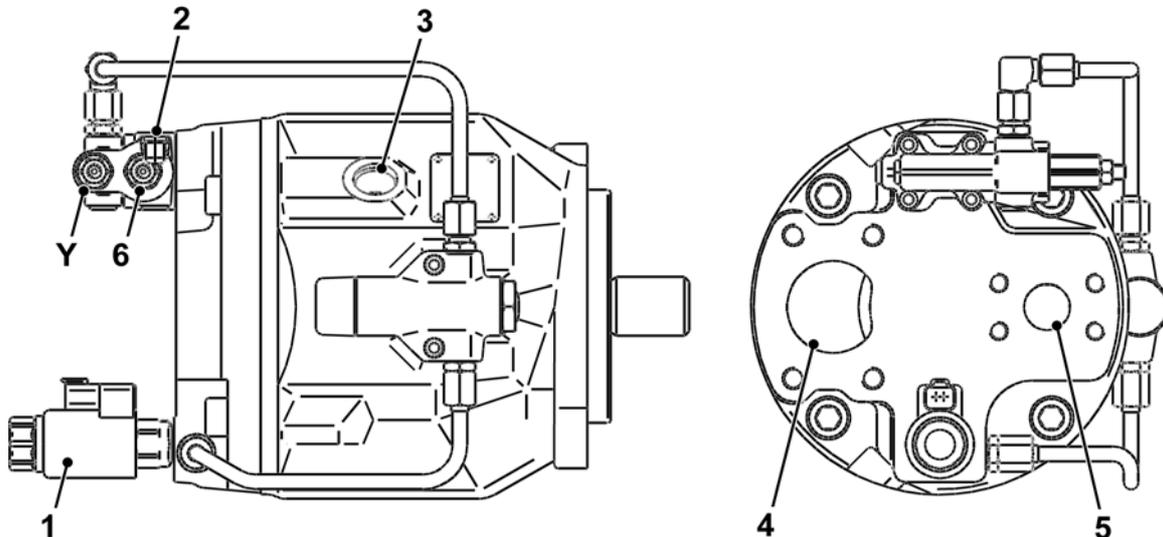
control of the pump. This cannot be reset on the machine and will have to be returned to the manufacturer.
